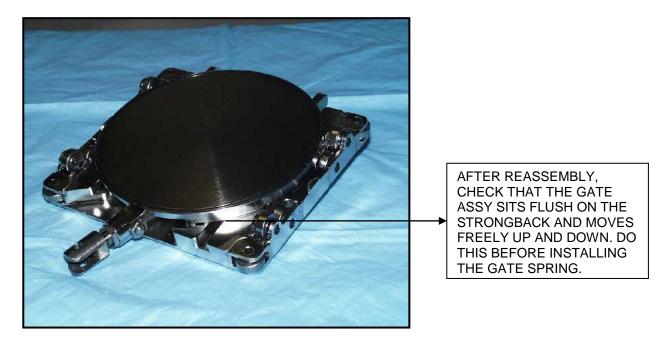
GATE AND STRONGBACK ASSYS AFTER REASSEMBLY
